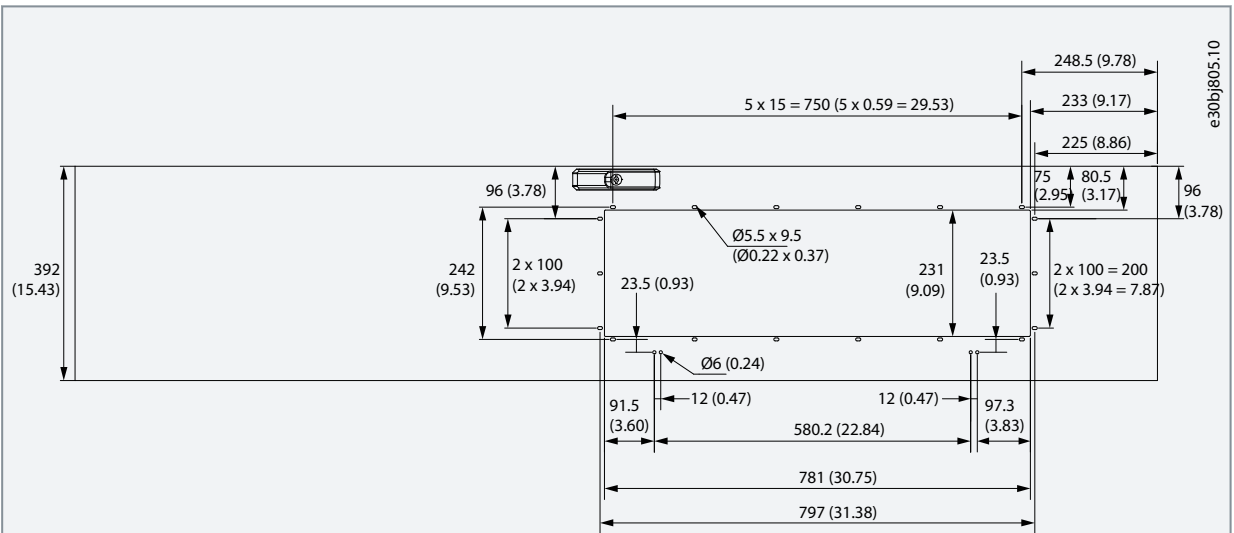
Dimensions for the Cut-out on the Cabinet Door in mm, Single-pump Cabinet
